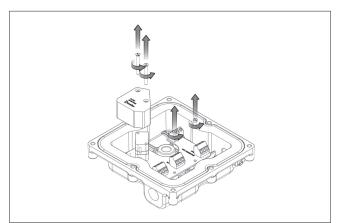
Removing the PCB and switch cover of V1, D1 and W1 switches
